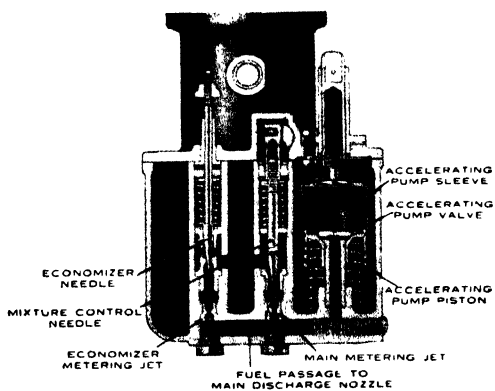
Section of Stromberg Carburettor, showing accelerating pump; mixture control for altitude; and economizer needle, i.e. enrichment for full throttle only.
